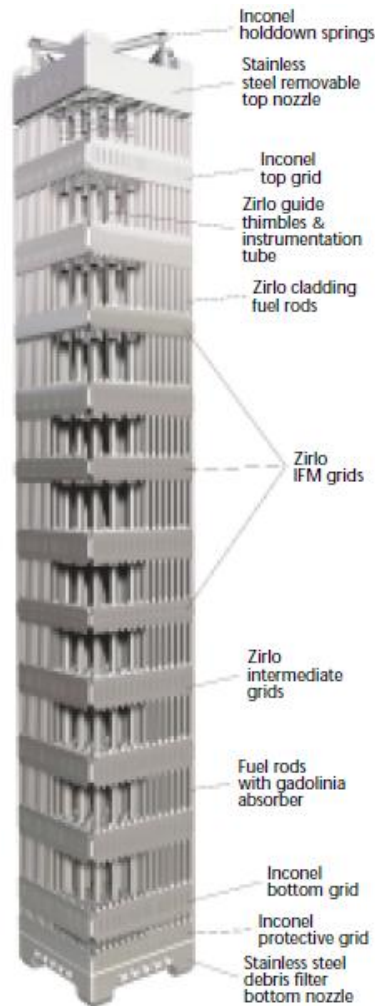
Reference Fuel Assembly for This Study (Westinghouse 17x17 type fuel assembly)
